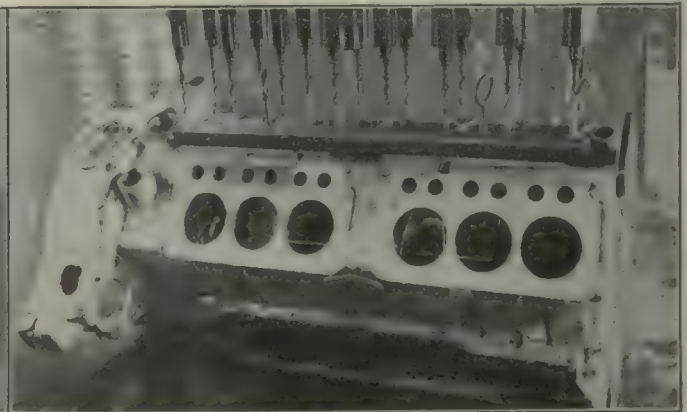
DRILLING CYLINDER HOLDING-DOWN BOLT HOLES
